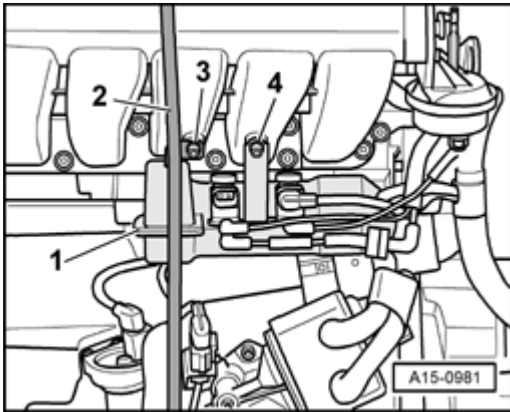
Identifying Mounting Bolts, Oil Dipstick Guide Tube & Vacuum Reservoir
